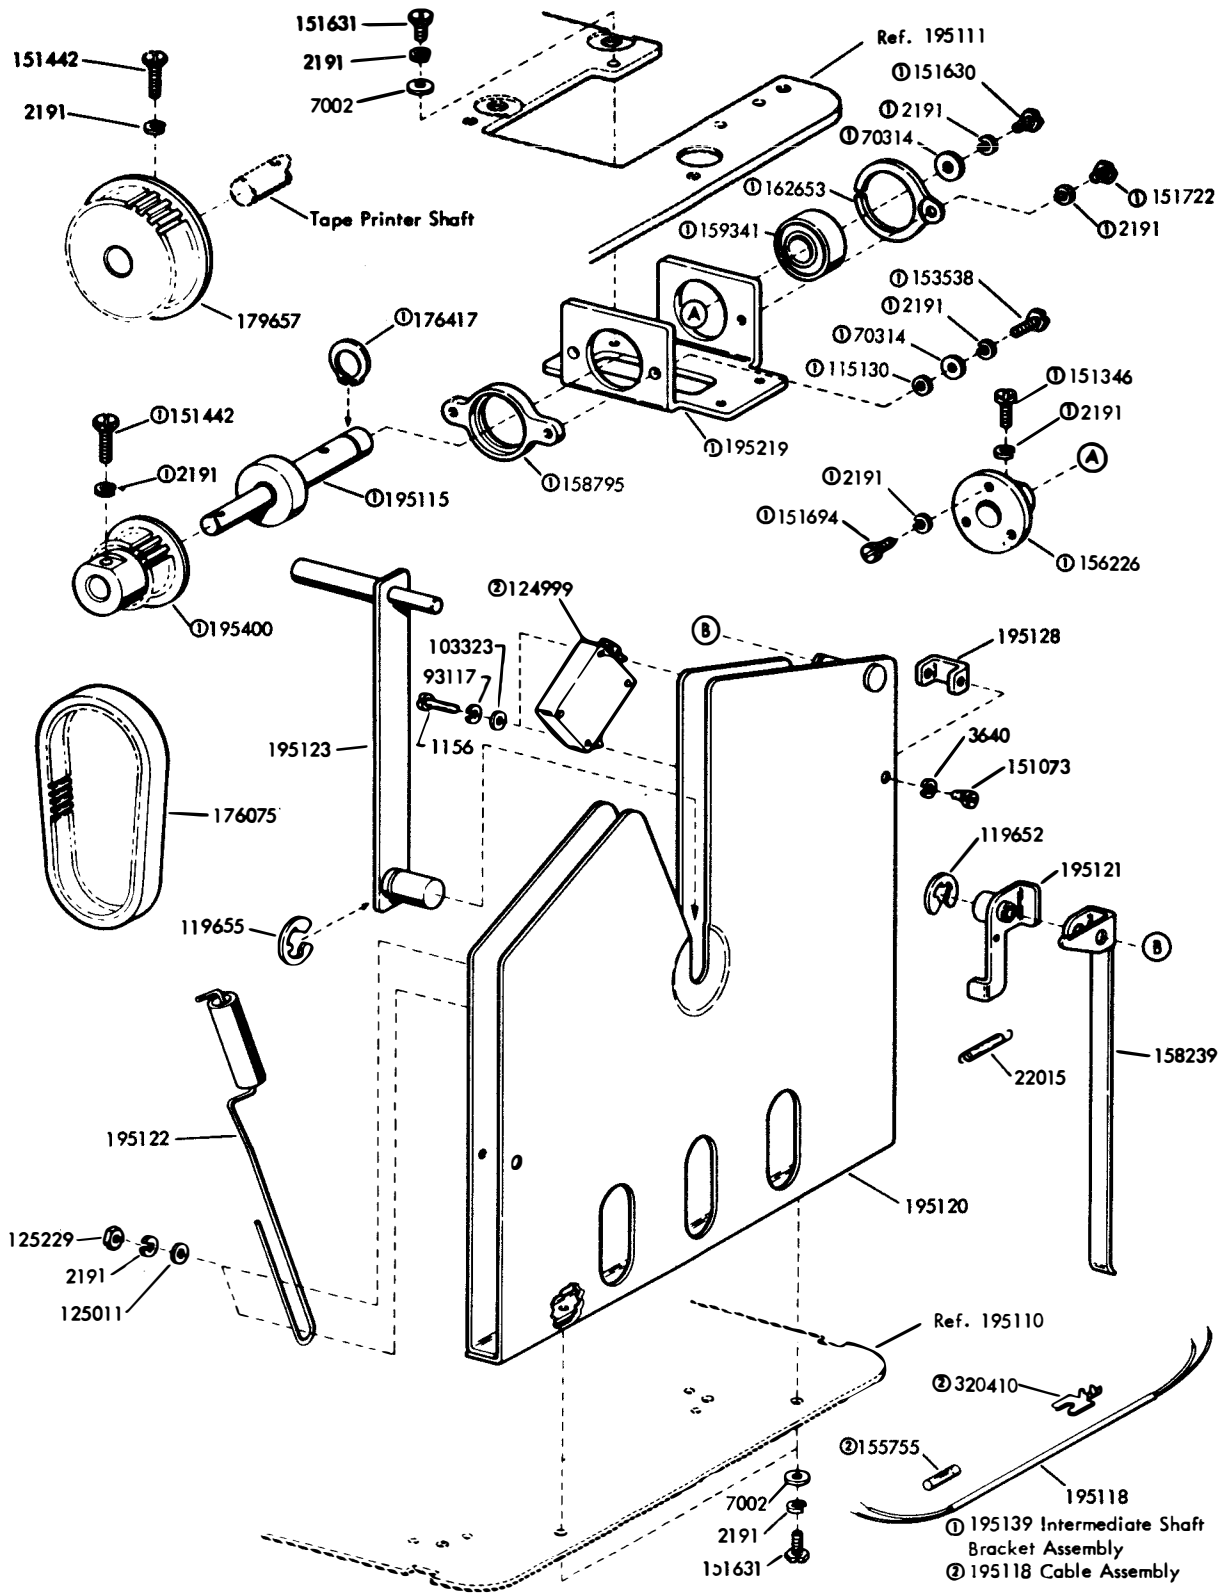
Compact Tape Printer Base (Sheet 2 of 2)
